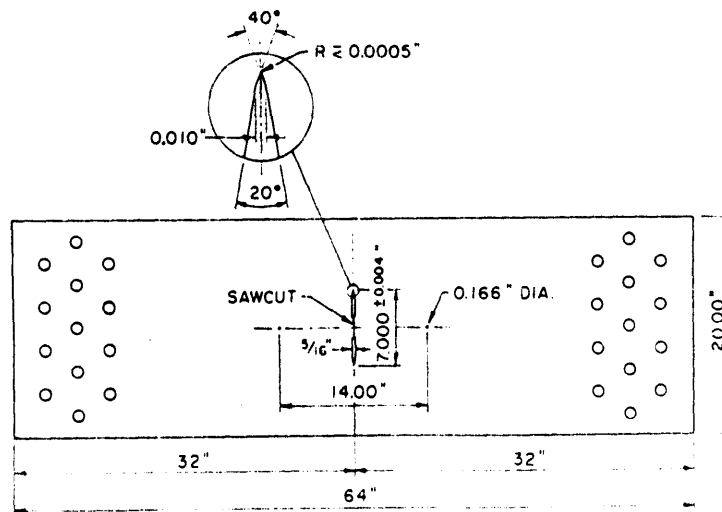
Center-notched fracture-toughness specimen (1.0 in. thick).
